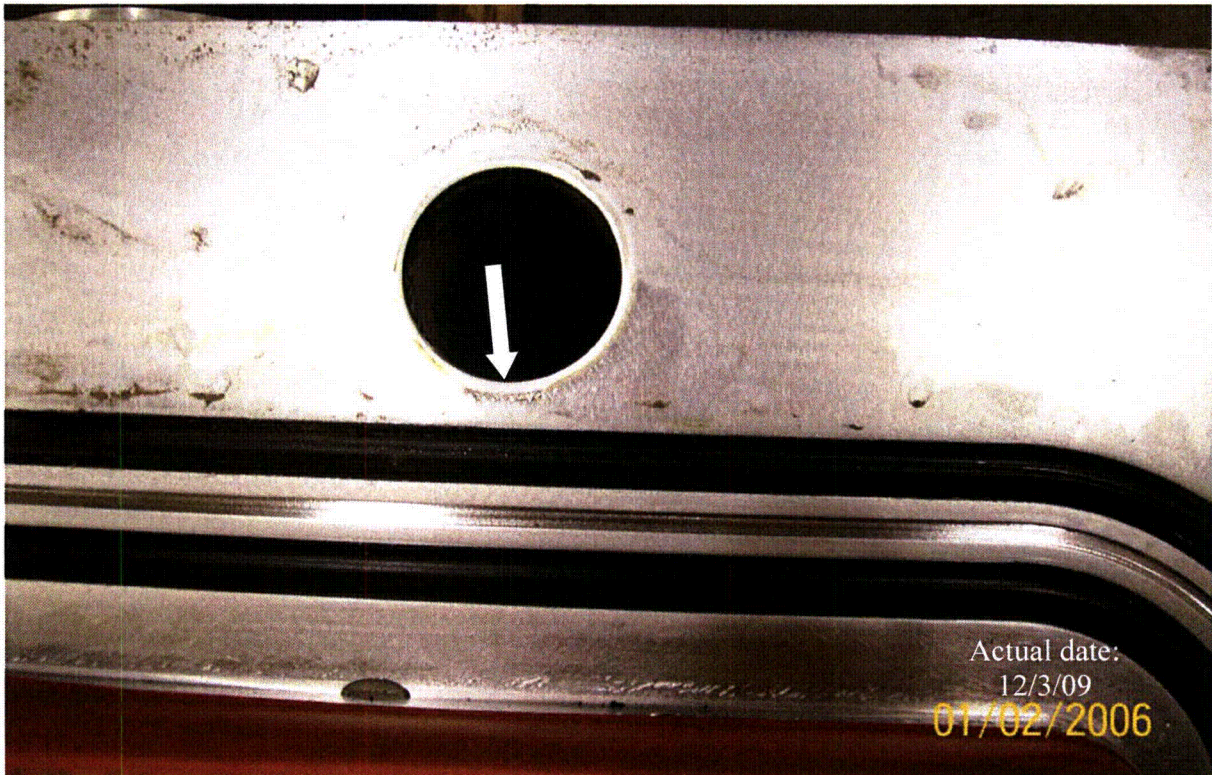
Galling on Flange Around Closure Bolt Holes
